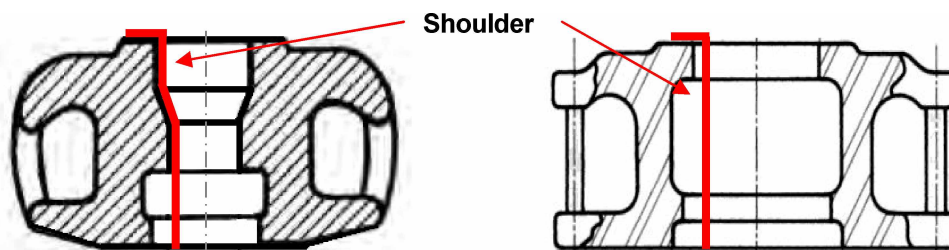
Drill pipe elevator⁵³ (left) and casing elevator⁵⁴ (right)
